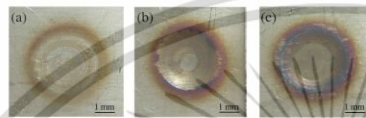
Appearances of the welded joints of SUS316 and SUS425 by all of UT R30 and LT different electrode shapes on SUS425 side (a) UT R30 – LT flat, (b) UT R30 – LT R 16, (c) UT R30 – LT R 30
